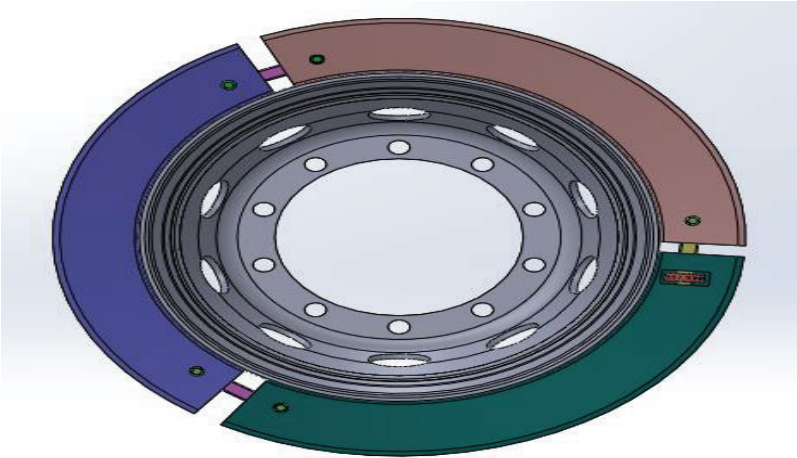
Mounting of 3 Piece Run Flat on the Rim
